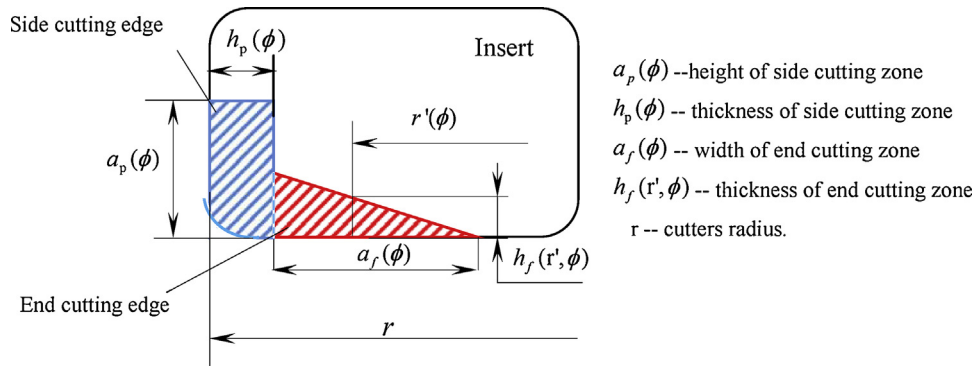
Cutting zone on milling cutter in orthogonal turn-milling.
